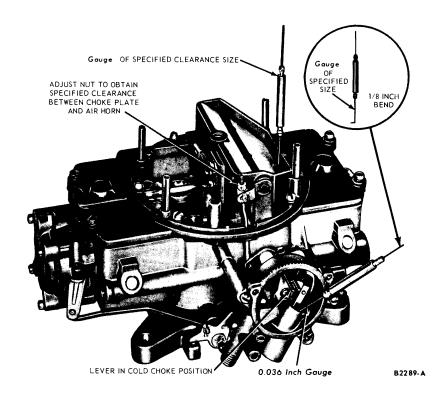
Choke Plate Clearance (Pull-Down) Adjustment
